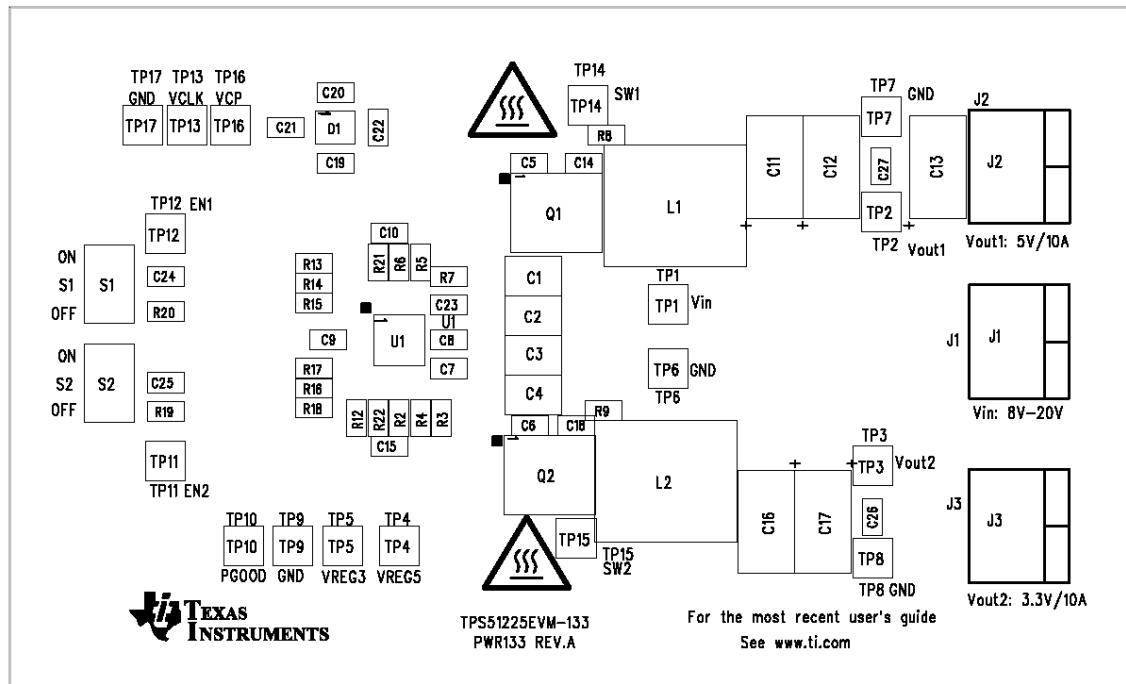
TPS51225EVM-133 Top Layer Assembly Drawing
